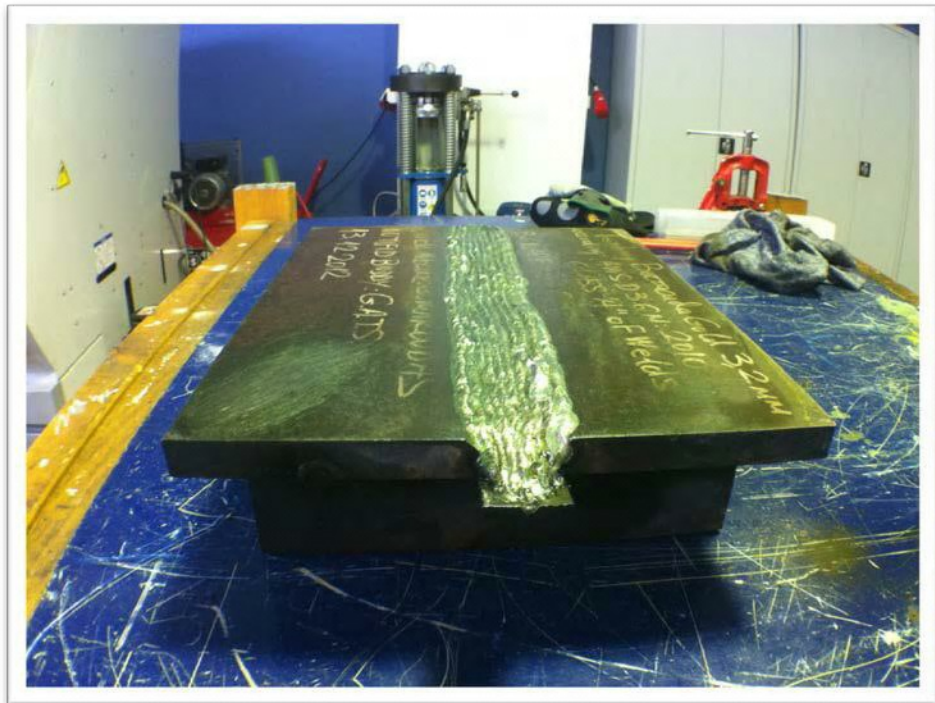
Test Piece as welded, looking longitudinally.
